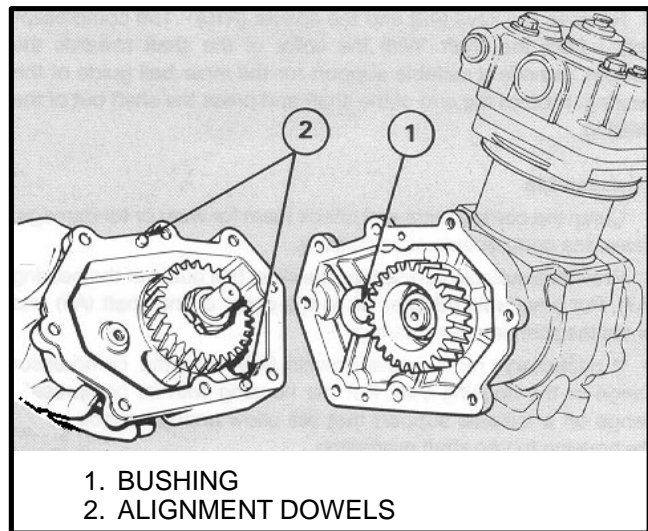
AIR COMPRESSOR, REMOVAL FROM THE DRIVE ASSEMBLY, WABCO
